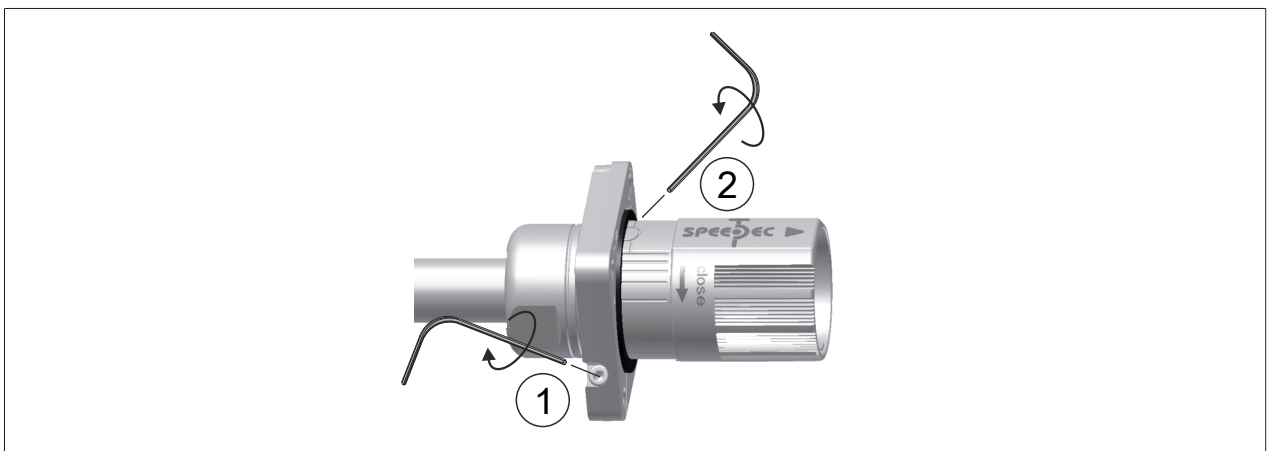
Attaching the metal flange to the connector (rear panel installation)
